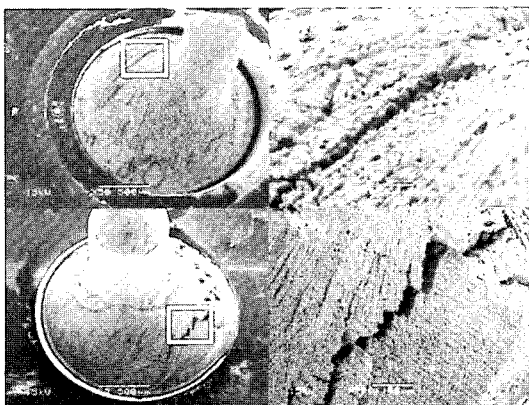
shows a solder joint surface of the prototype electronic product applying lead free solder(Sn-3.0Ag-0.5Cu). The shrinkage is similar with the solder joint crack externally. So we have studied the characteristic and growth behavior of the shrinkage by the temperature cycling test and optimized the manufacturing process to remove the shrinkage.
